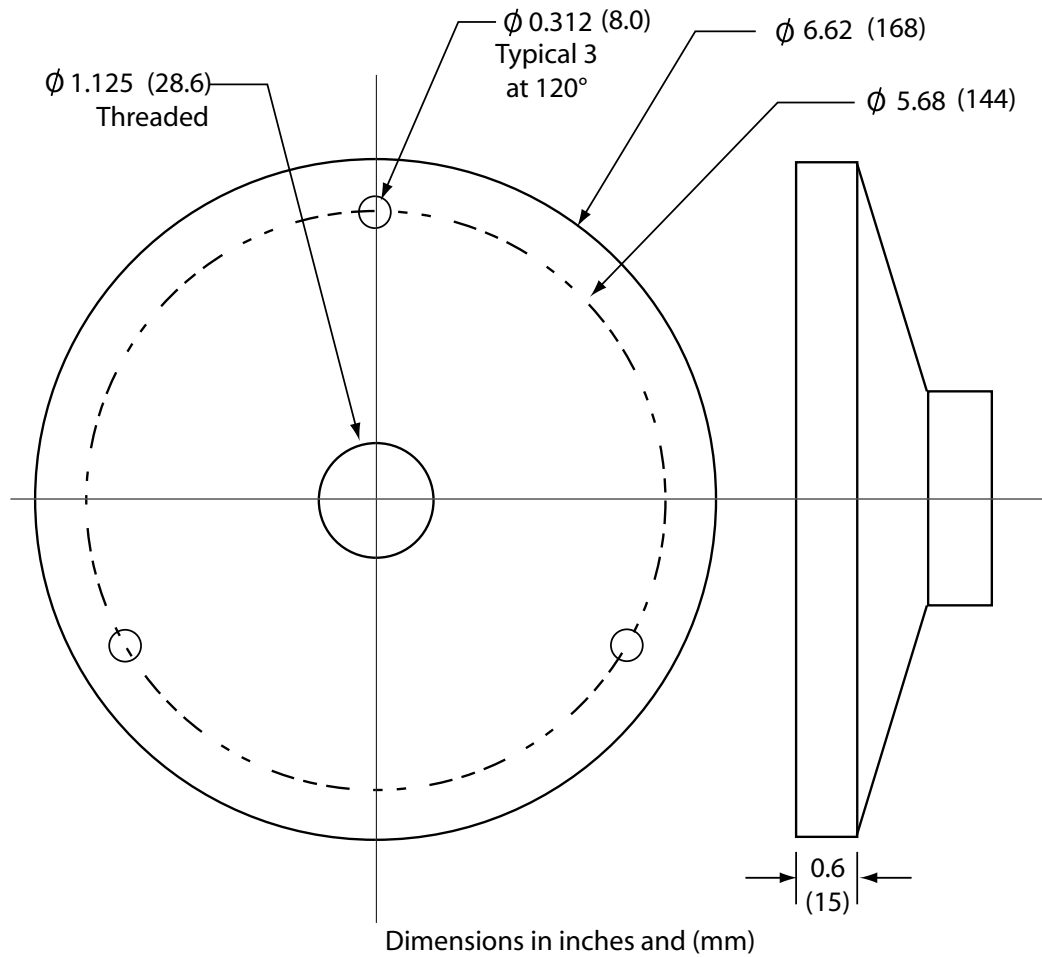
Mounting Dimensions, Ceiling (CEIL) Mount Plate
